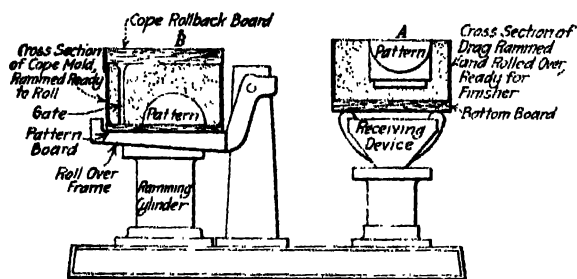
Jolt Roll-Over Molding Machine Producing Work from Loose Patterns
